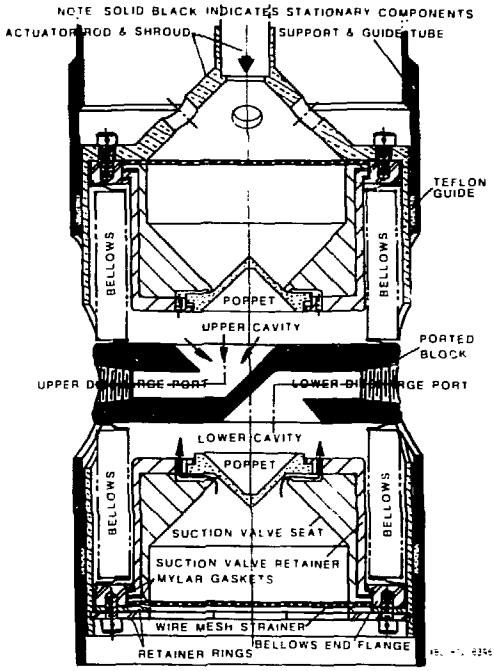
Cross-Section View Of The Helium Pump Chamber
